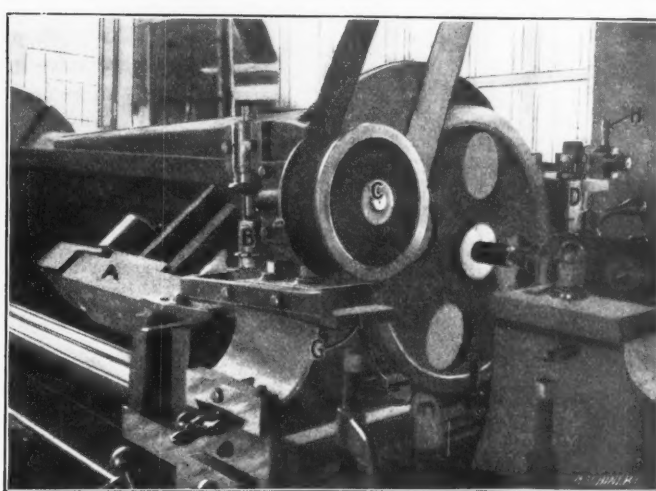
Showing the Wedge G for inclining the Gashing Cutter.
